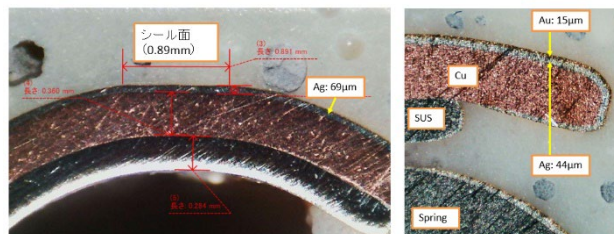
Cross section of U-tight seal with Ag + Au coating after disassembly at June 2018.
